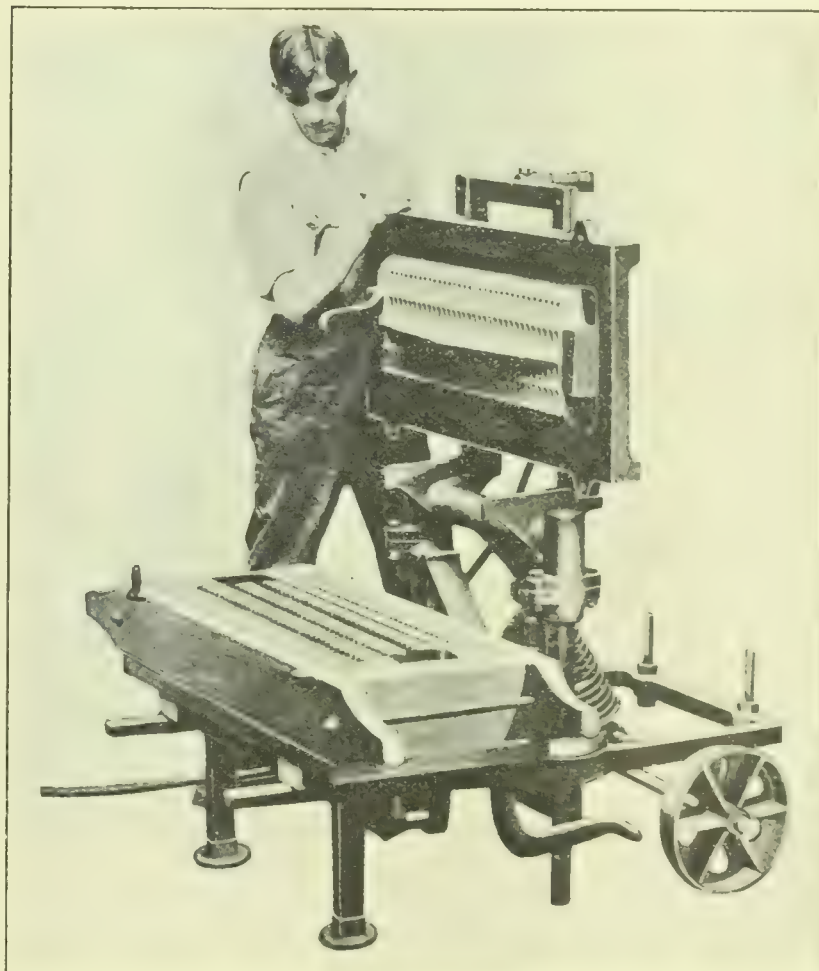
MOULDING MACHINE WITH ADJUSTABLE SWING FRAME AND SLIDING HEAD.
